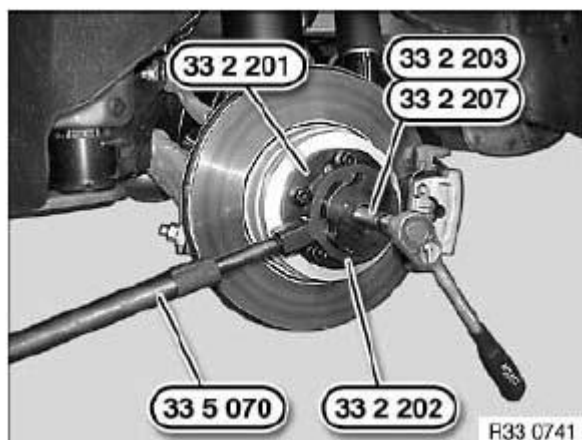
Identifying Special Tool (33 2 203, 33 2 207 And 33 2 201) With All Wheel Studs To Drive Flange
